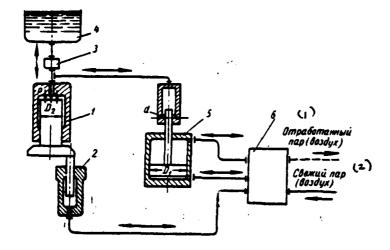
The schematic diagram of press with the steam (air) multiplier: 1 - working cylinder; 2 - cylinder of recurrent course; 3 - filler valve; 4 - filler tank; 5 - steam (air) multiplier; 6 - controls.
